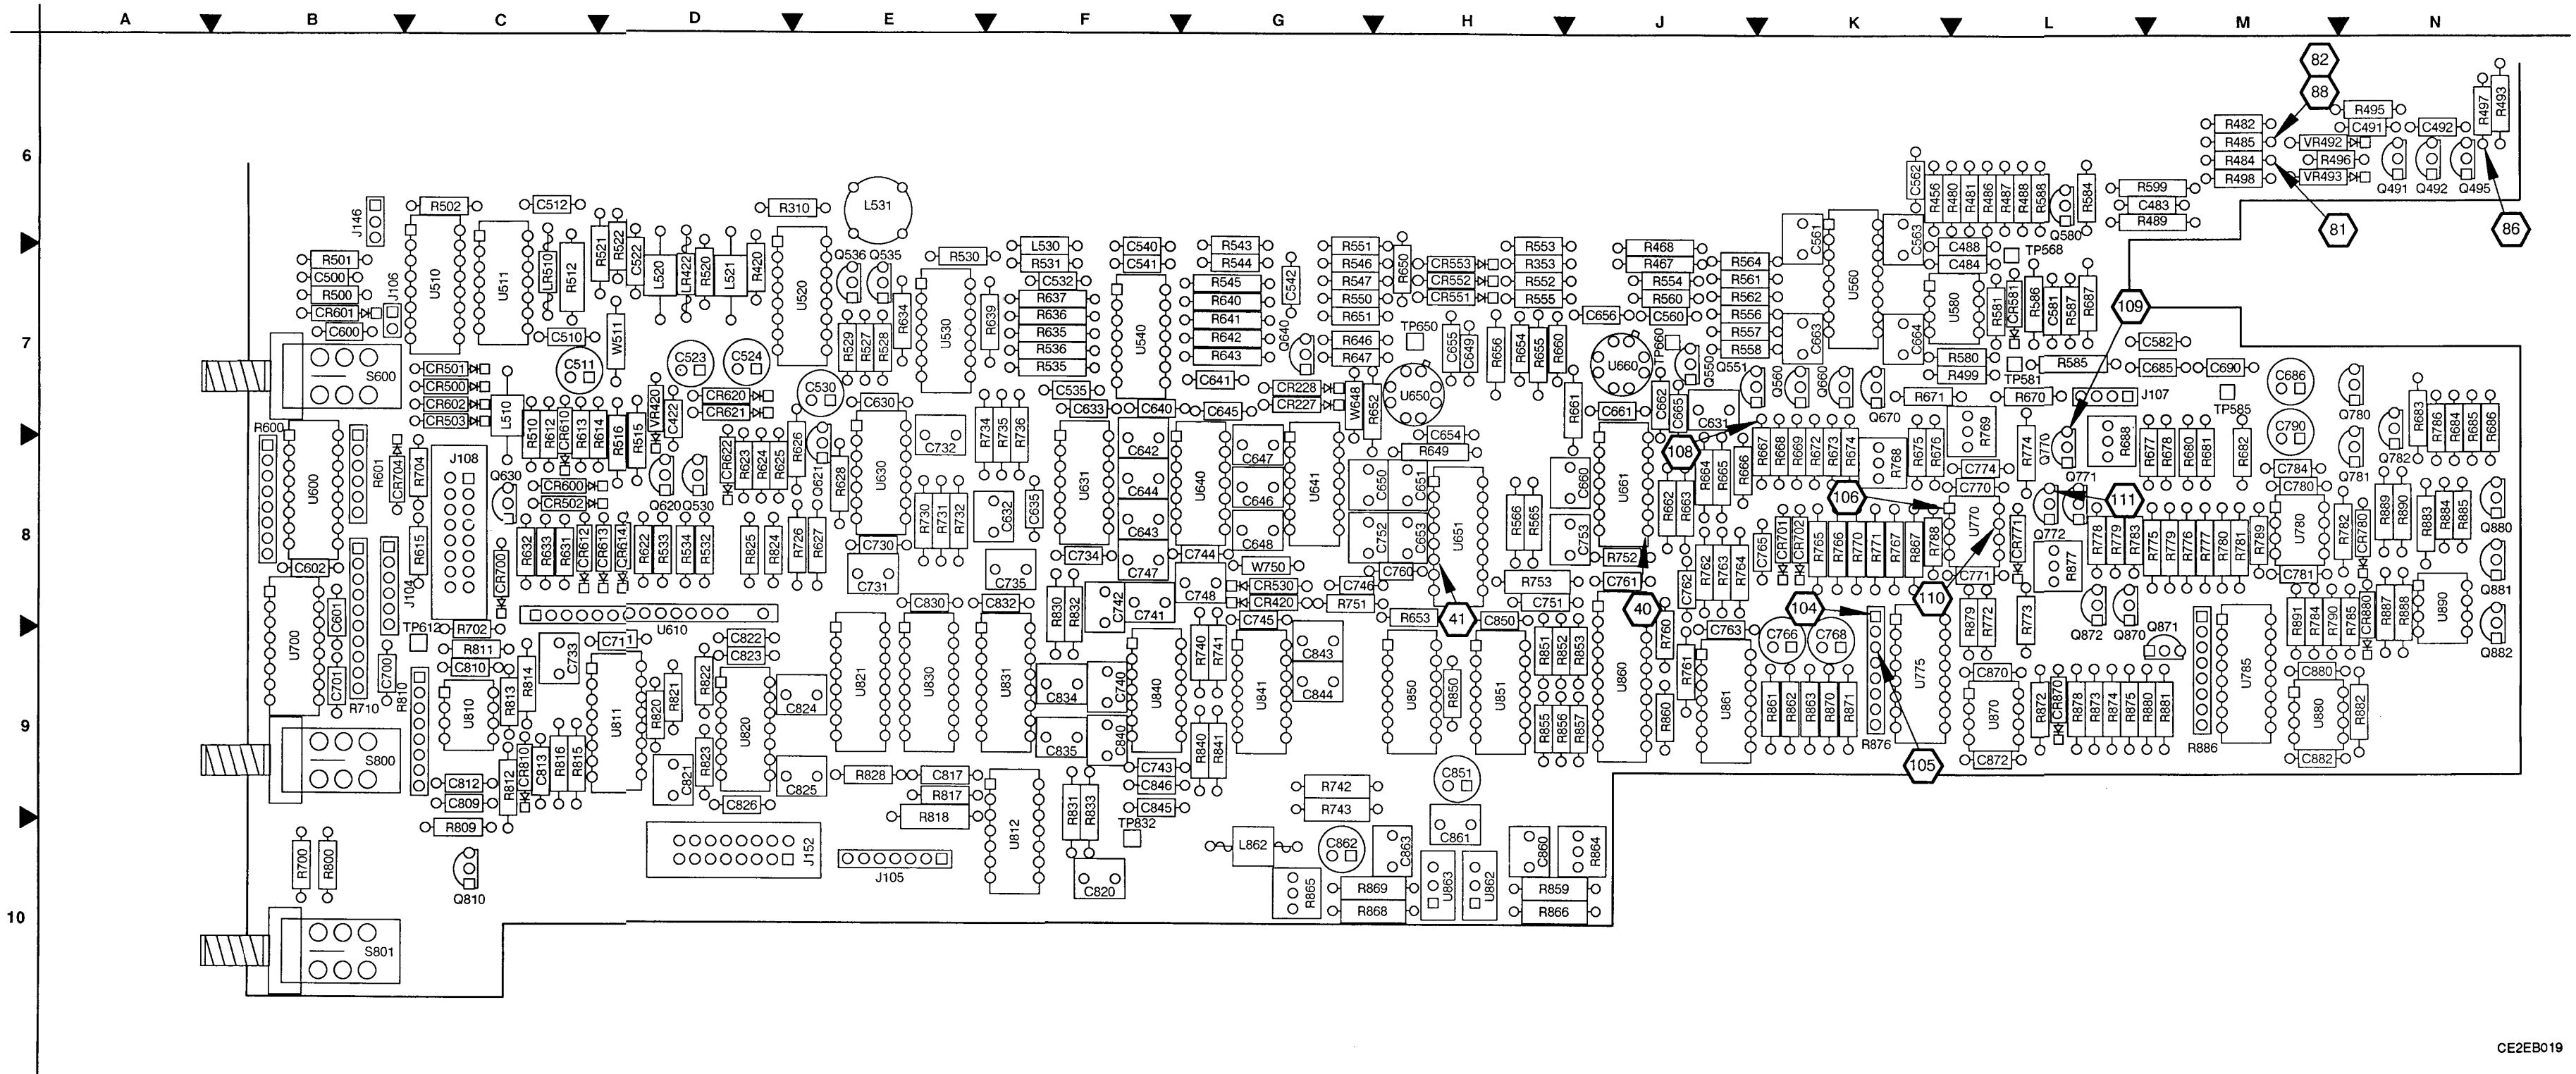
A10 Main Board Component Locator (Sheet 1 of 3).
